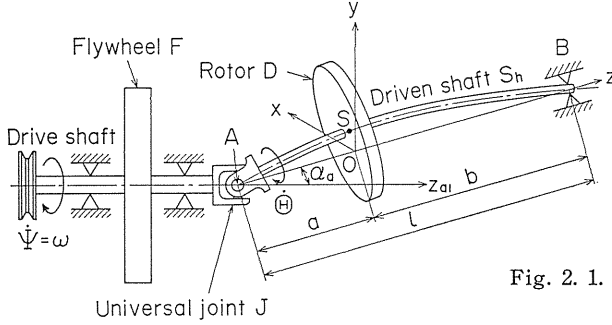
1. Shaft S_h and rotor D driven by a universal joint J .
